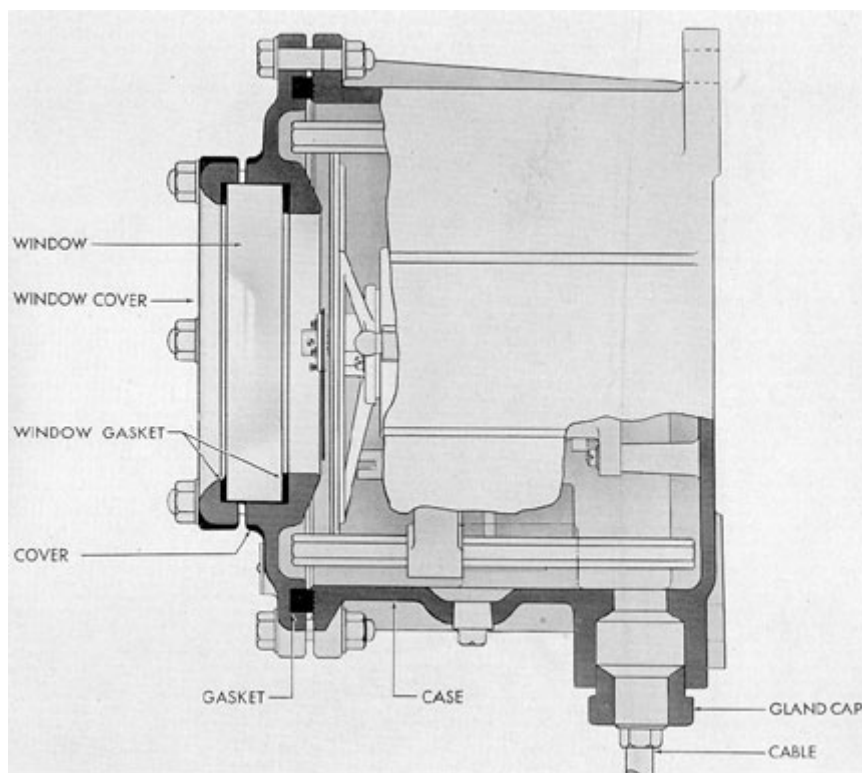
Rudder angle Indicator, showing pressure-proof construction for bridge installation.
